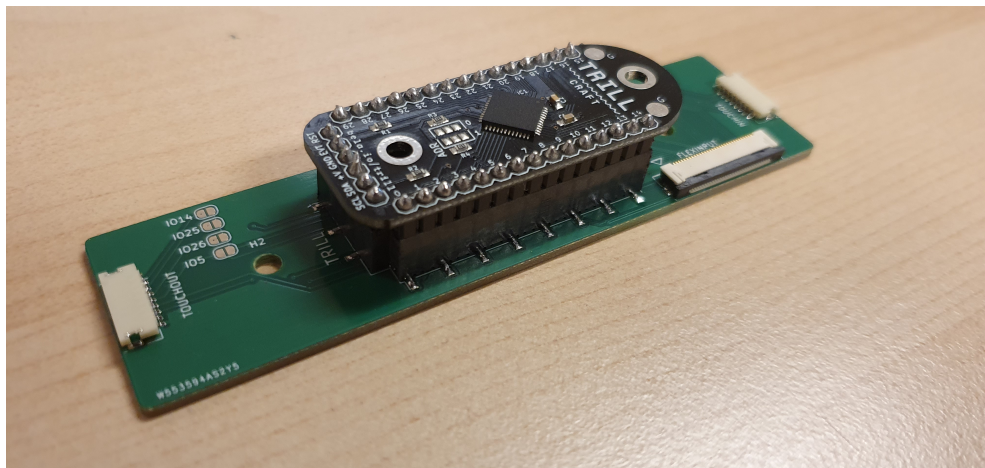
Extension Touch Boards for longer T-Sticks
